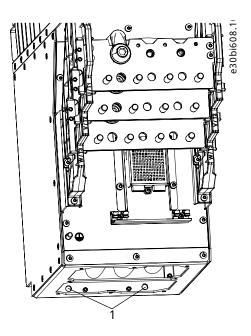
Bottom Screws of the Short Integration Unit, IR10, IR11
